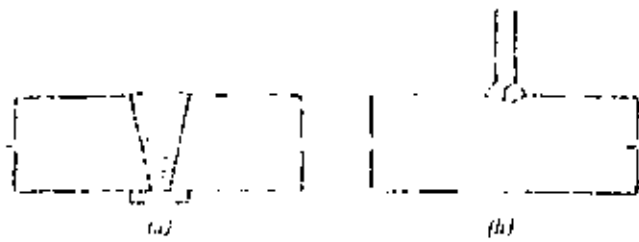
A groove-welded butt joint in thick plate (a) requires a higher preheat because of joint restraint, than a fillet-welded joint of a thin member with a thick plate (b). See Section 2.3 for the minimum preheat recommended by AWS.
